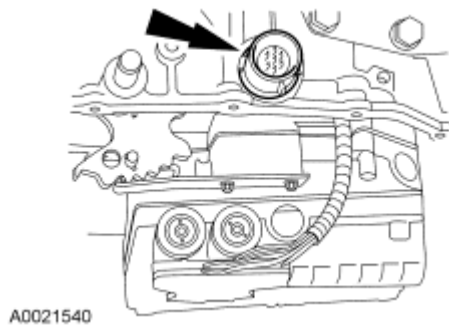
Locating Solenoid Valve Body Electrical Connector Retaining Tabs
